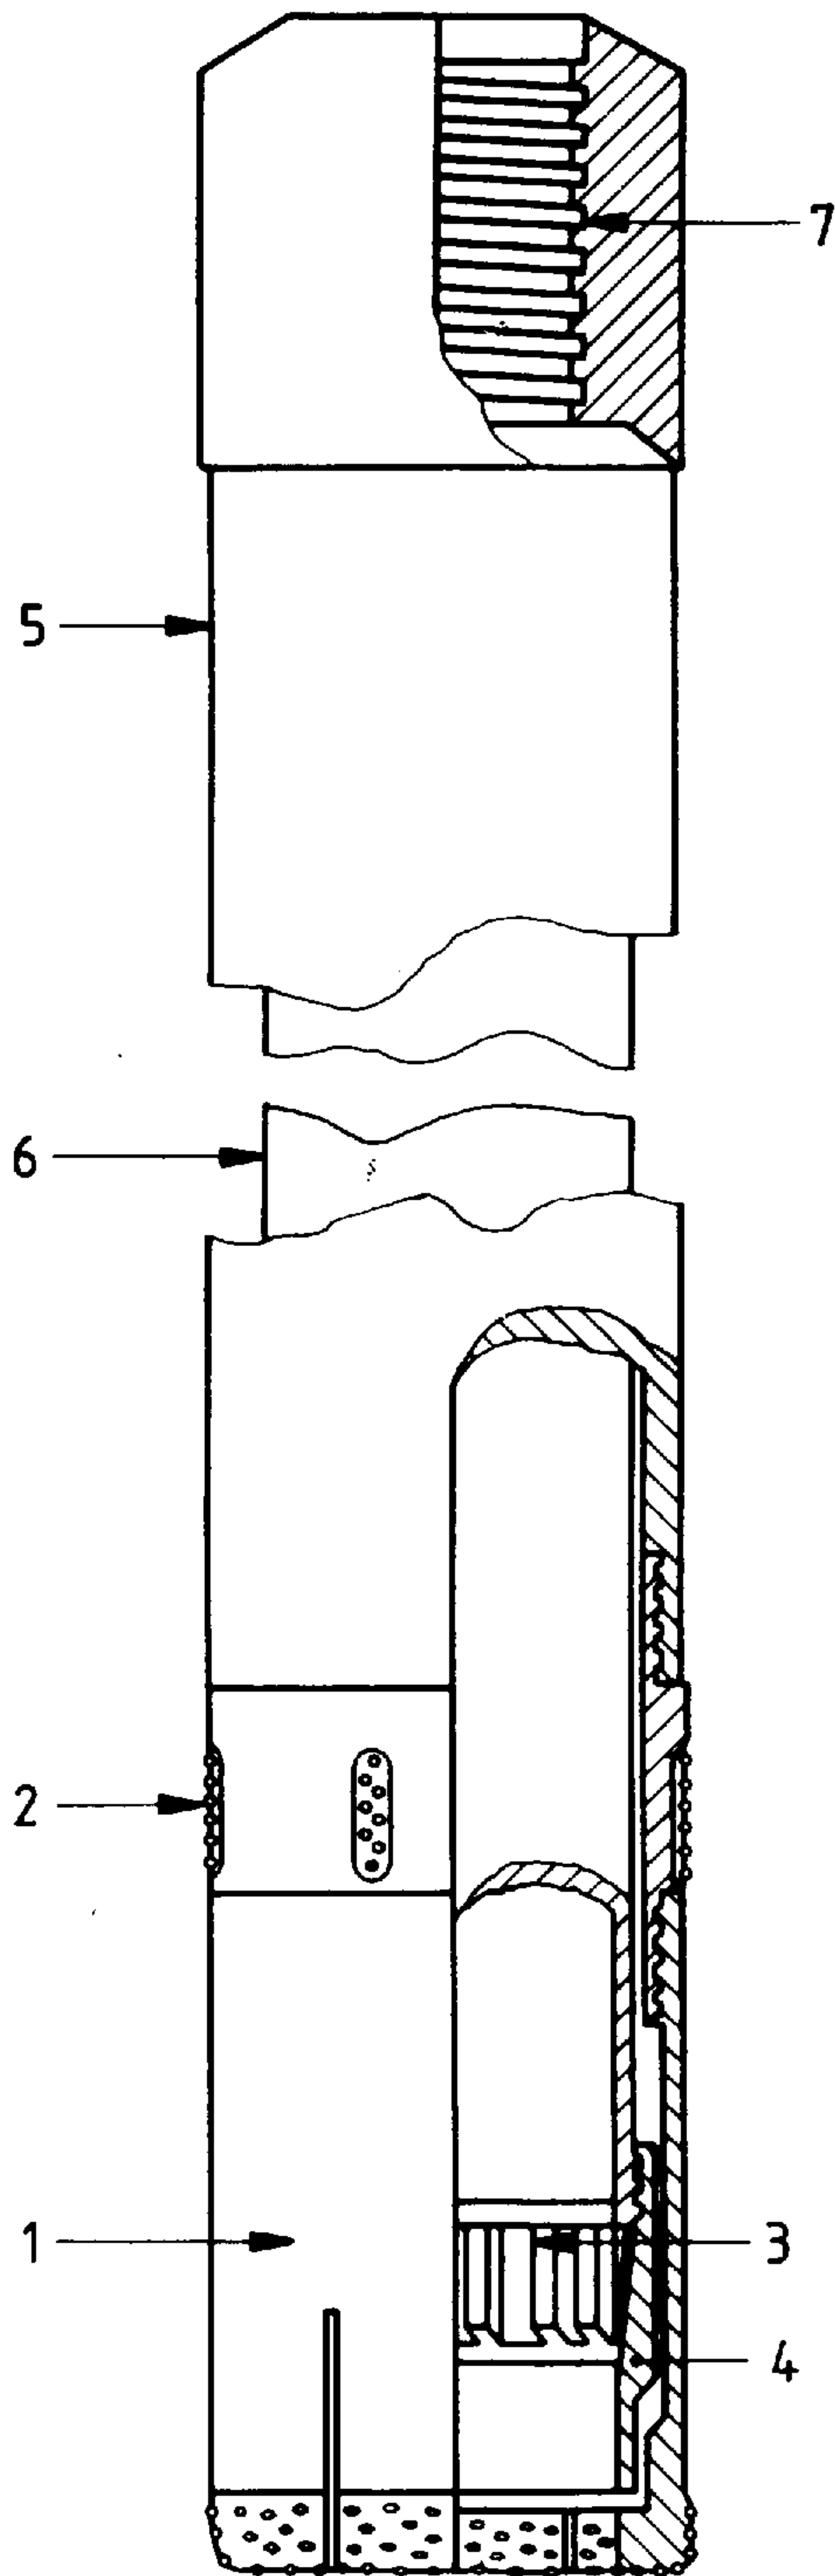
"WG" design double-tube core barrel — Head (see table 35)
